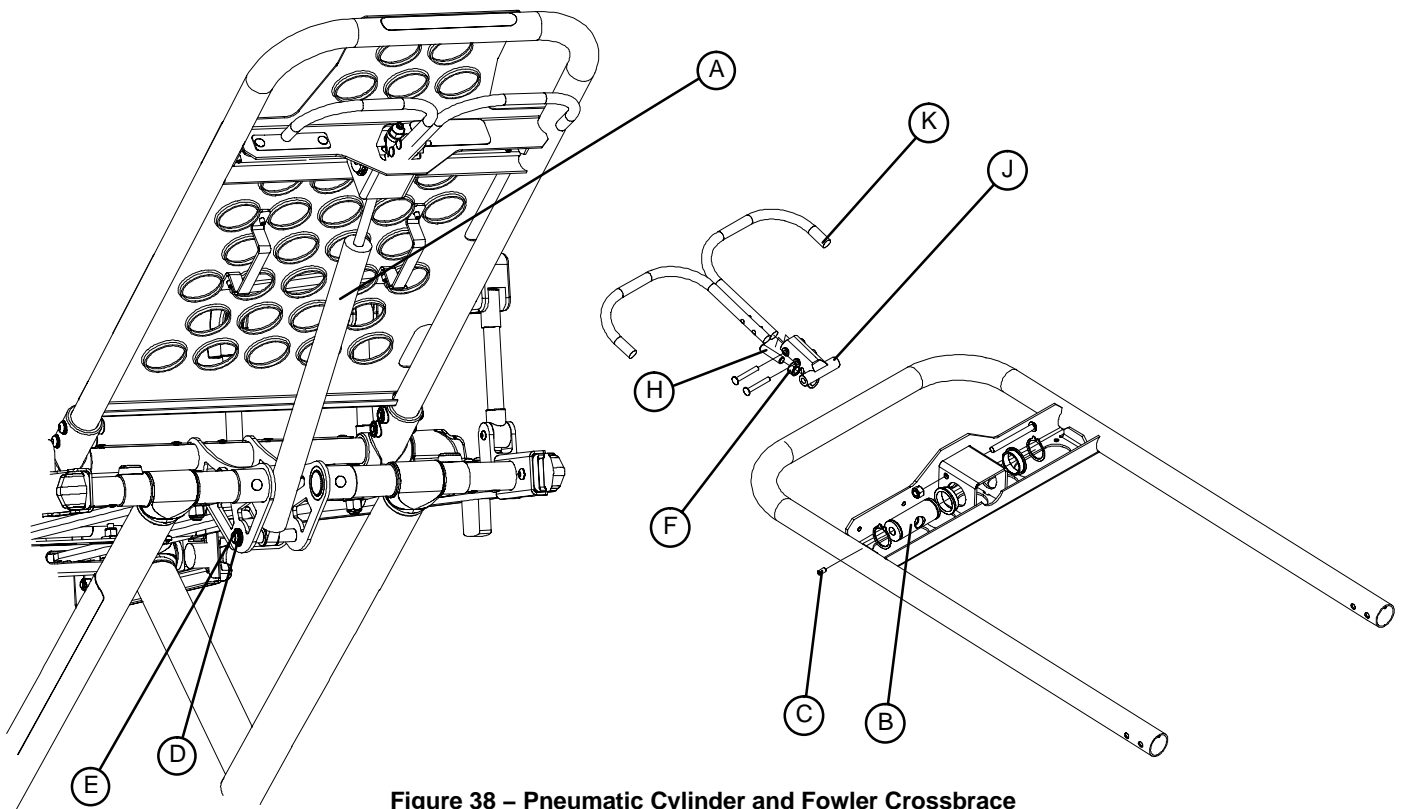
Pneumatic Cylinder and Fowler Crossbrace
